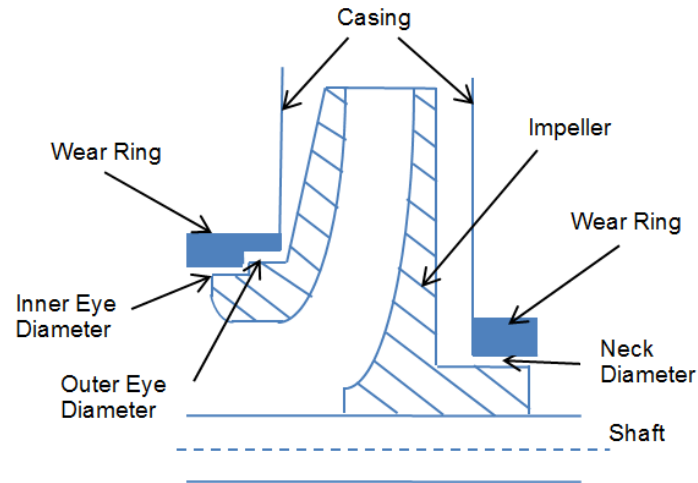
Matla SFP 2<sup>nd</sup> – last stage impeller sectional view
